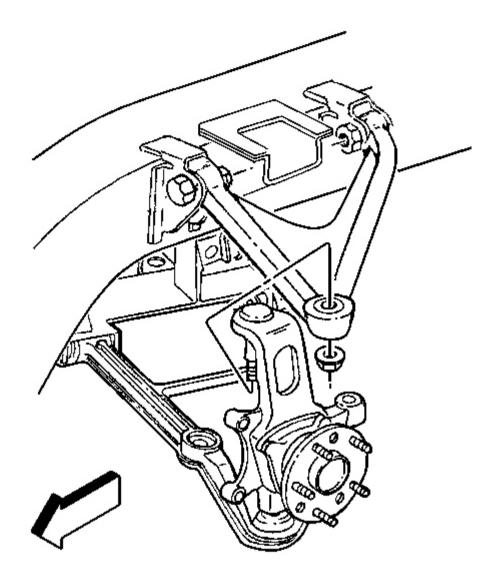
Upper Control Arm & Bolts Courtesy of GENERAL MOTORS CORP.
